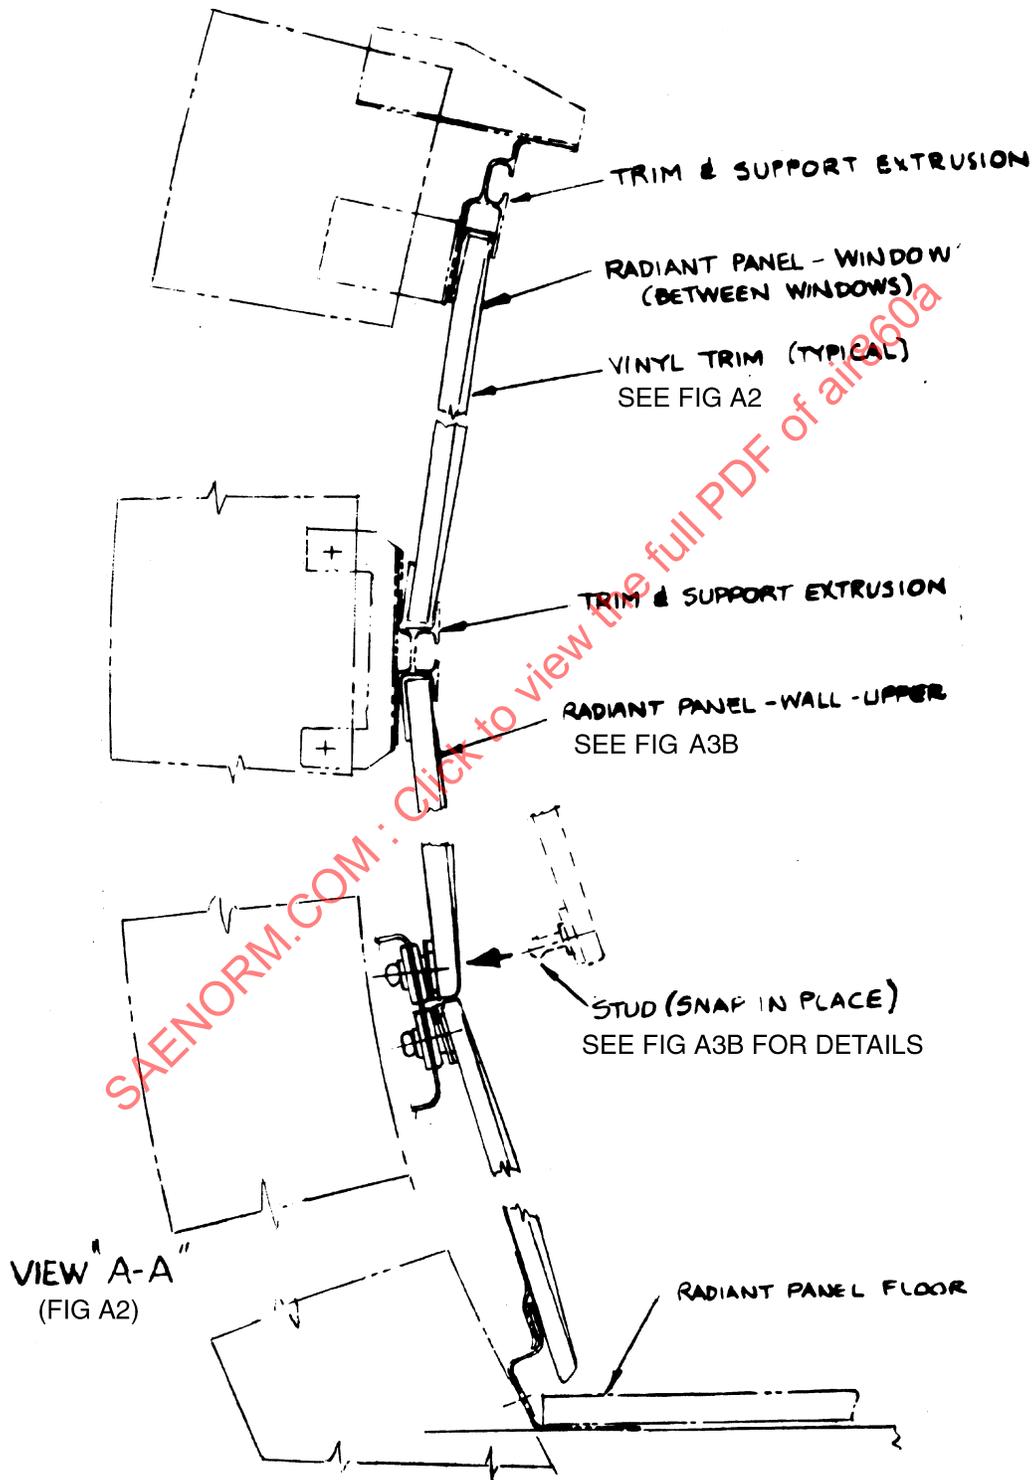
A - Cabin Wall and Floor Radiant Panels - Sect. View
